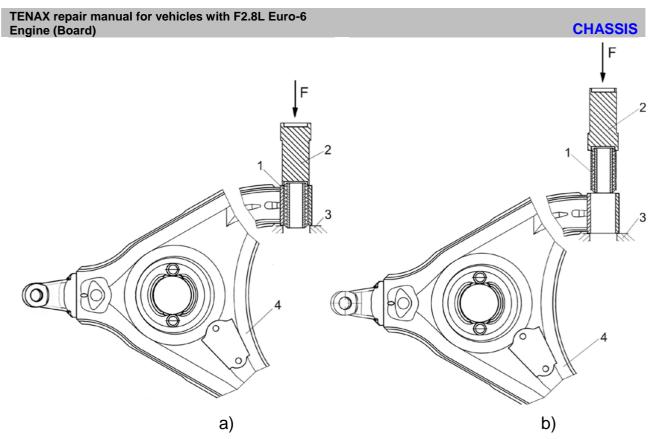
Pressing out and pressing in the lower suspension arm silent block: a - pressing out the silent block; b - pressing in the silent block; 1 - silent block; 2 - mandrel; 3 - support; 4 - lower suspension arm
